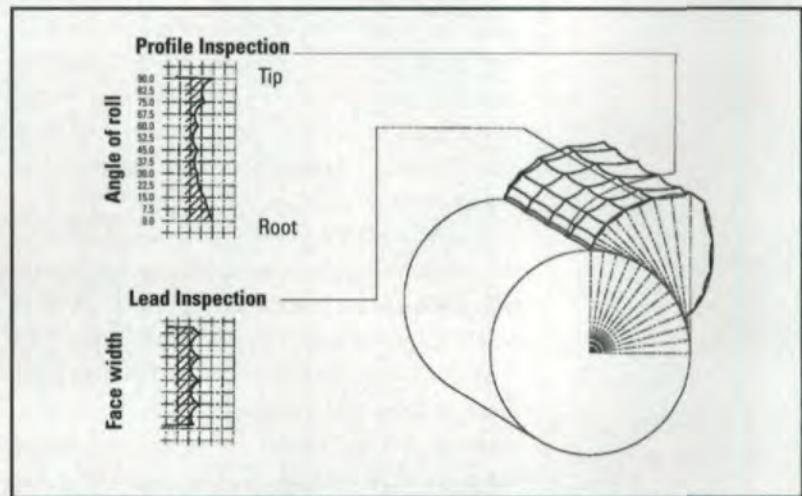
Helical gear tooth topology. Excessive feed marks may affect gear profile.
